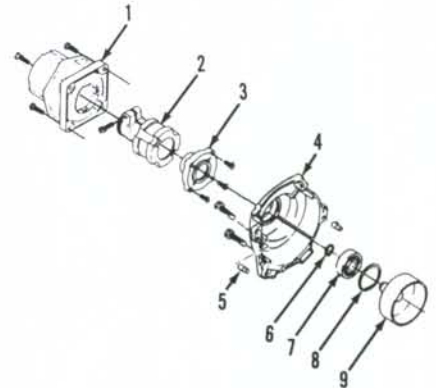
Exploded view of clutch drum assembly used on some models.
